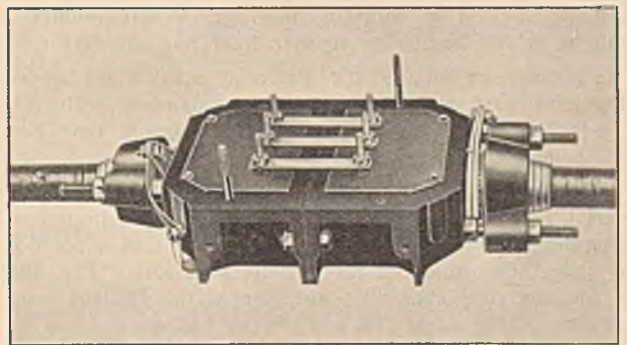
Ellison Mining Type Cable End Coupling (cover removed).
